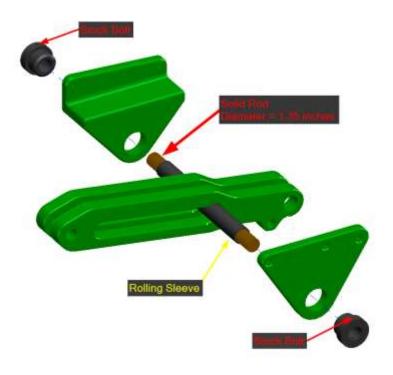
Exploded view of arm, pivot pin, and rolling sleeve.
